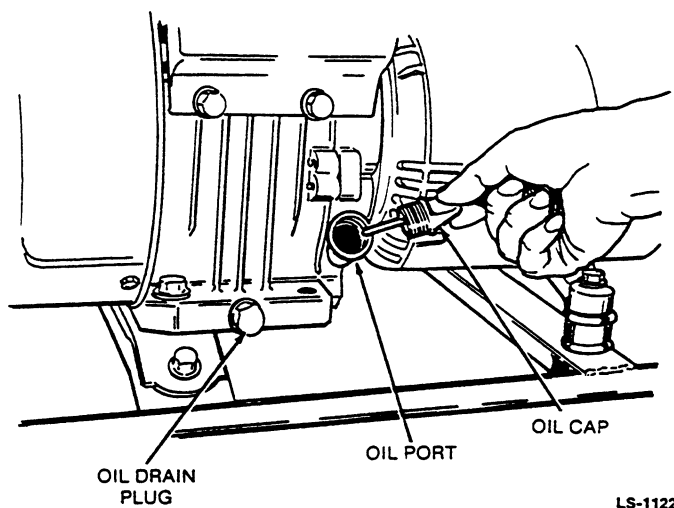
ENGINE OIL CAP, OIL PORT, AND OIL DRAIN PLUG
